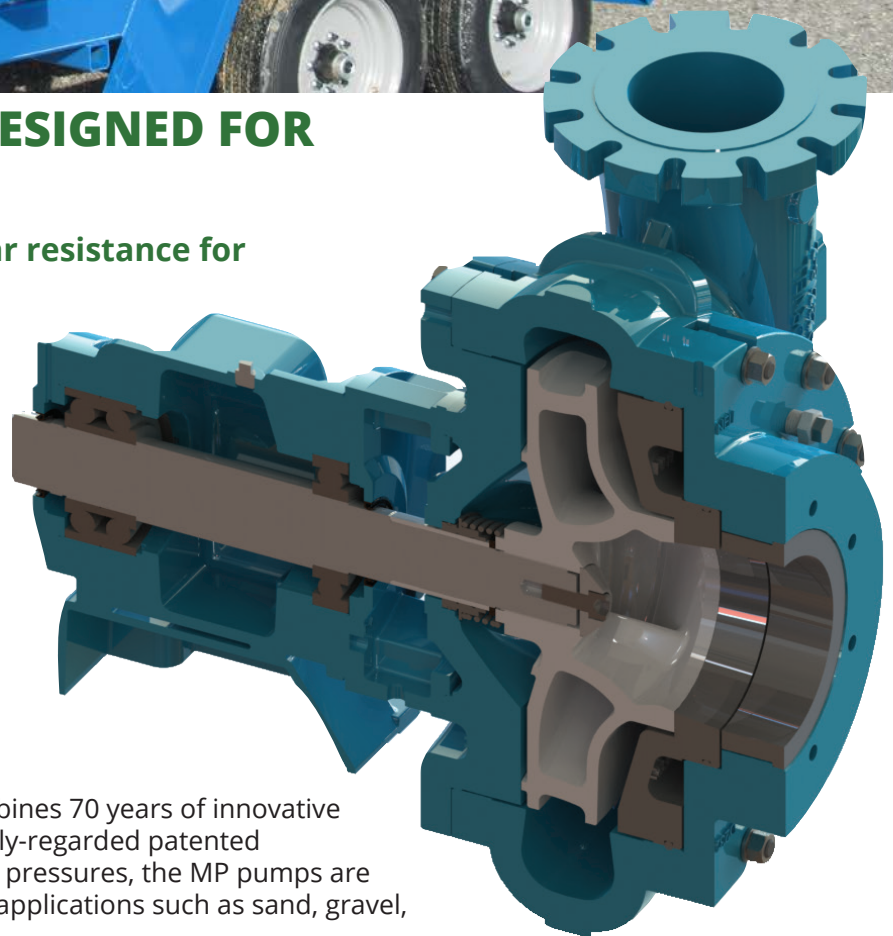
IMAGE COURTESY OF BAMBAUER EQUIPMENT
